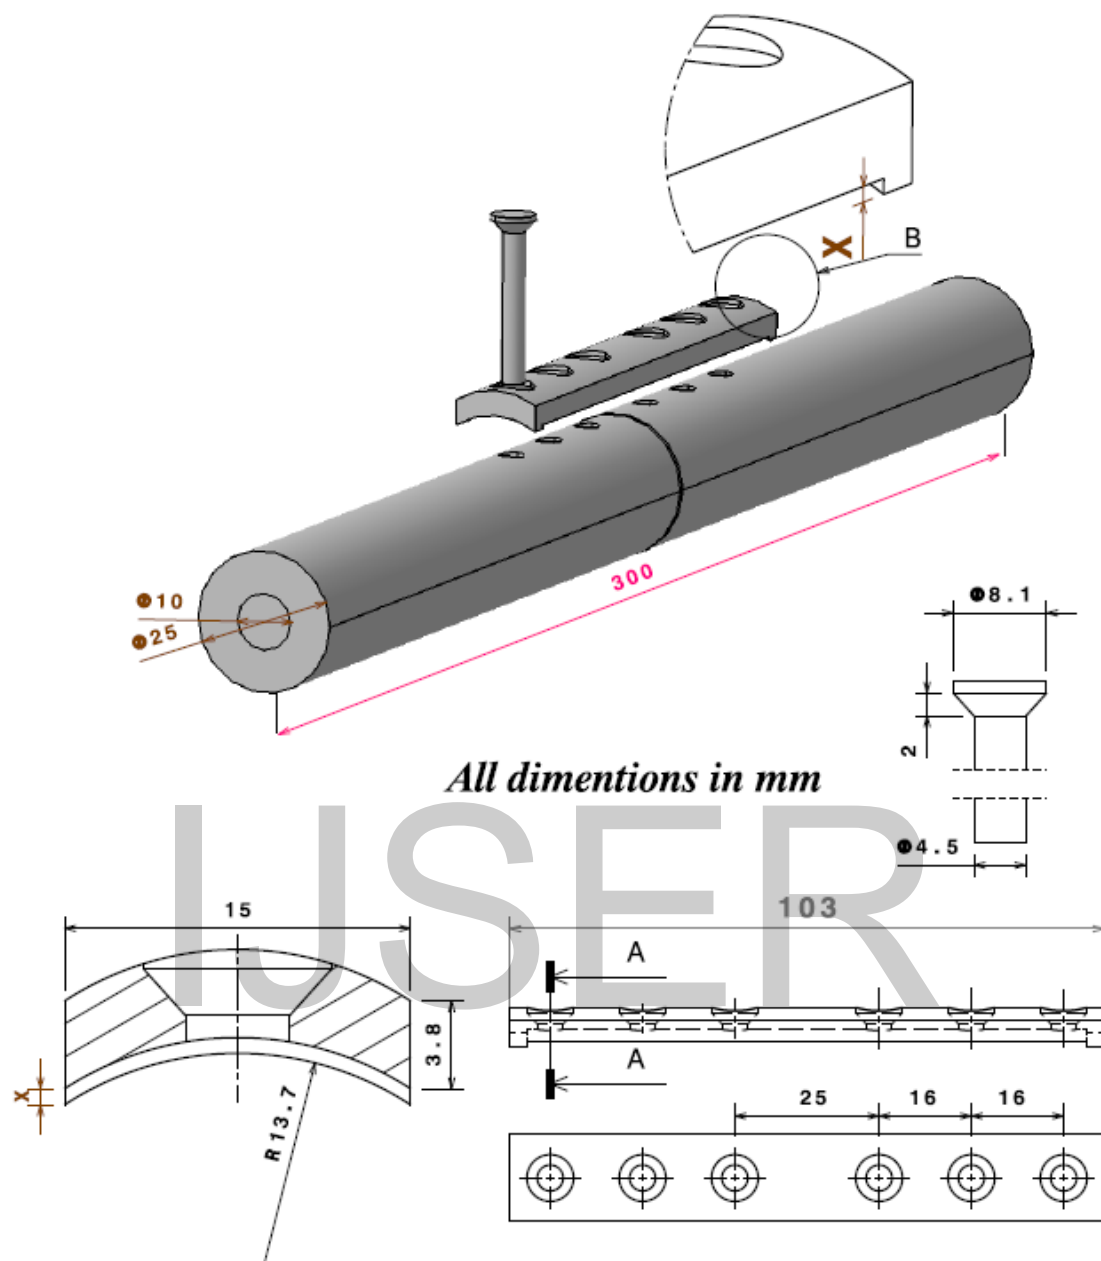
Geometry details of the assembly parts (simplified fractured tibia, bone-plate and screws).
